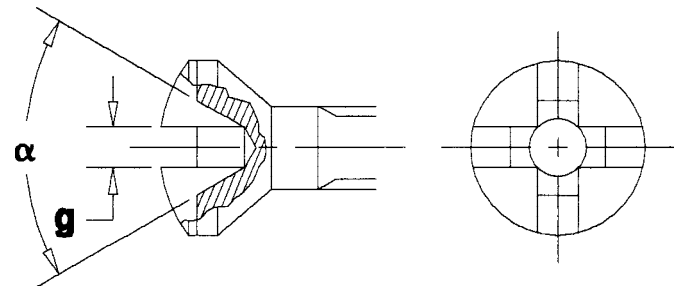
Schematic of Screw with Combined Cruciate-Slot and Cross-Recessed Drive Connection (Table A6.5)
